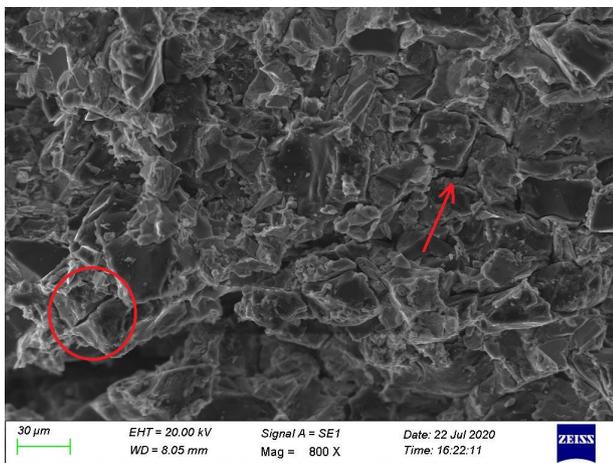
The fracture surfaces of the impact test of the 1-mm thick specimen (Cracks have been pinpointed with a red circle and a red arrow).
